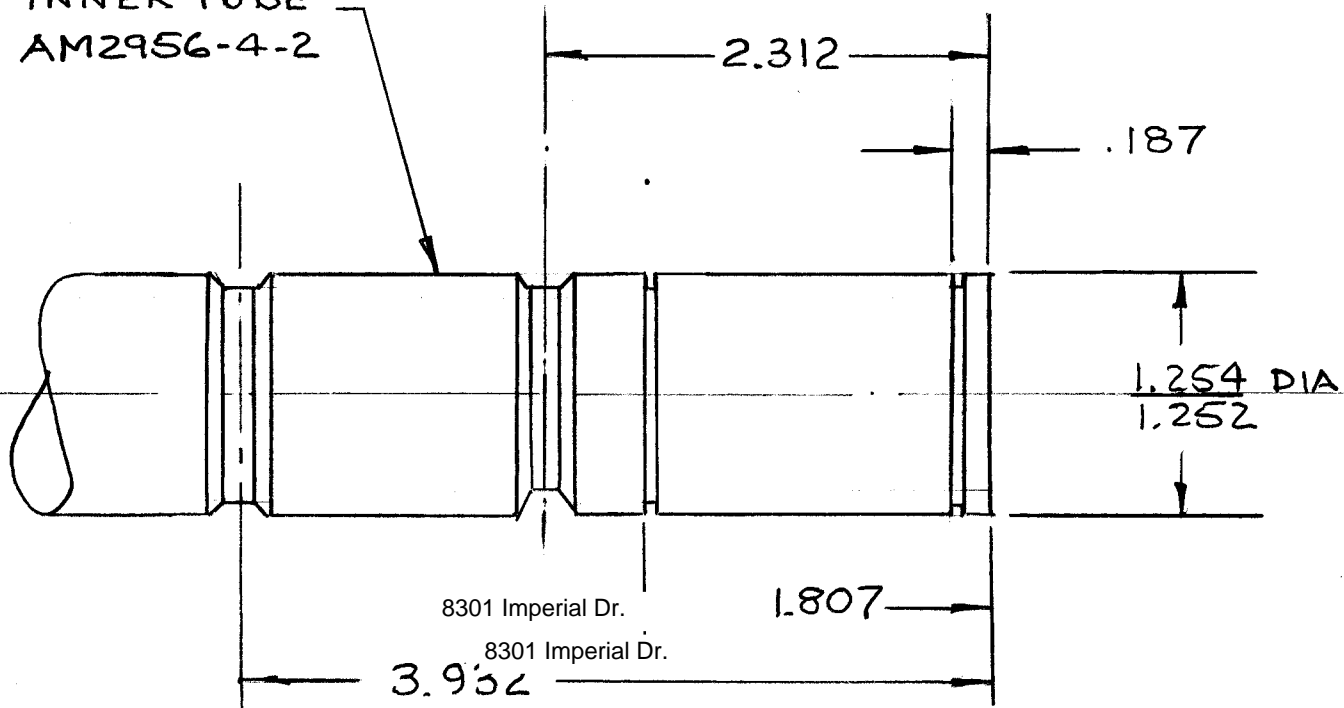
STRUT ASSEMBLY A2956-5A
